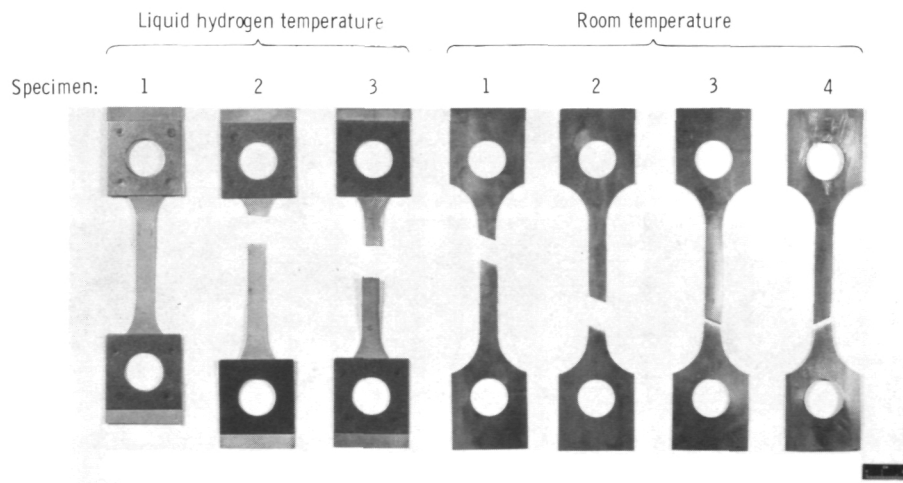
Electroformed nickel tensile specimens after testing (ref. 4 material).
